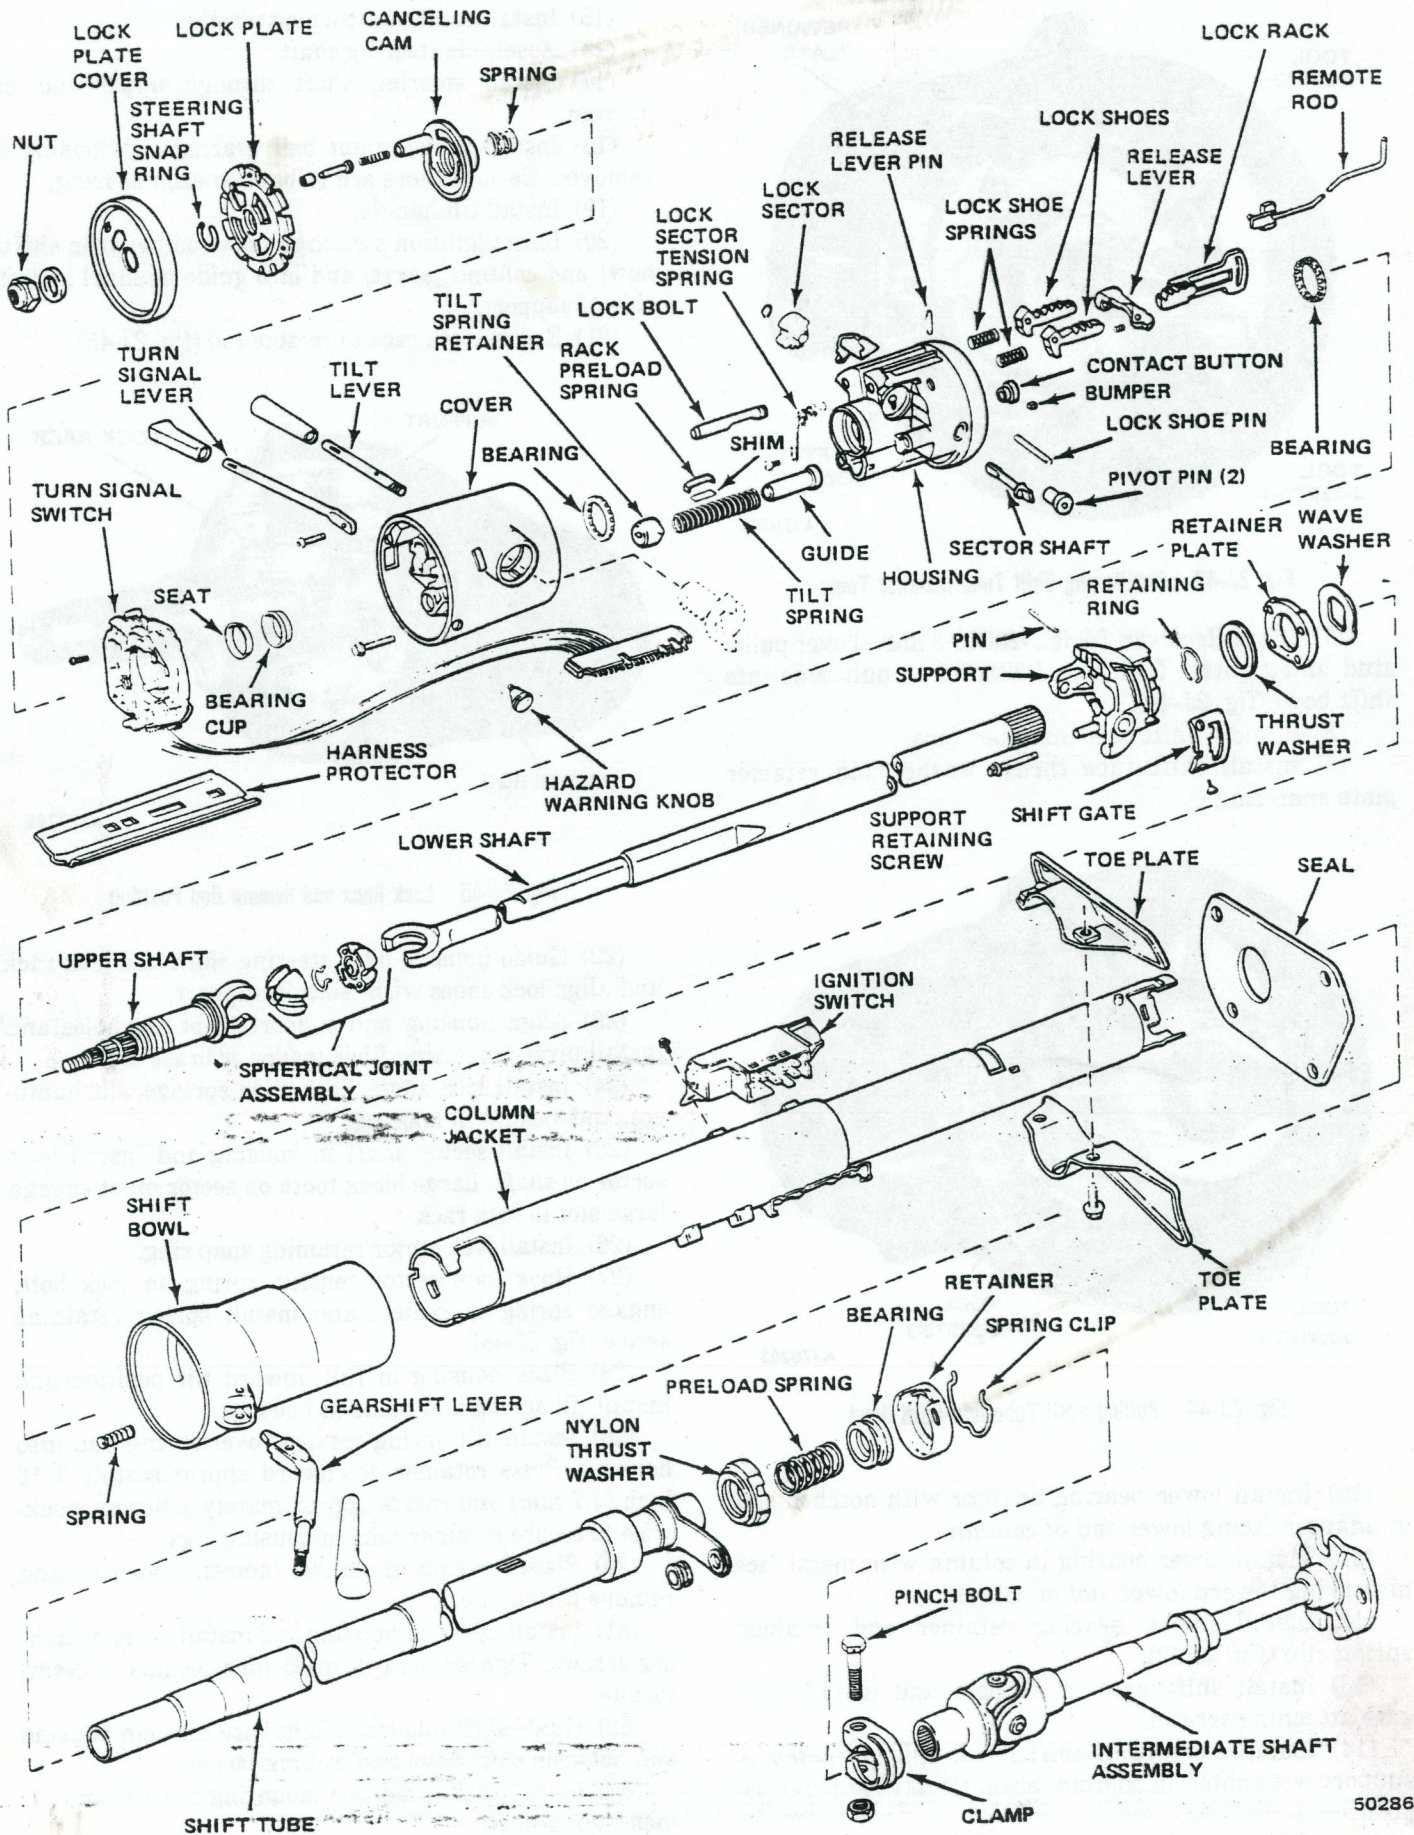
J-42 Tilt Steering Column—Cherokee-Wagoneer-Truck Models
